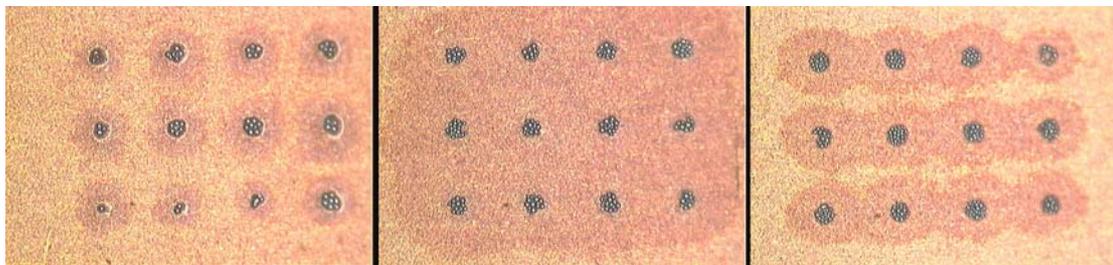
Example prints of types 3 (left), 4 (centre) and 5 (right) solder pastes through 100 μ m circular apertures in 75 μ m thick electro-polished laser cut stencil (magnification 25X)
